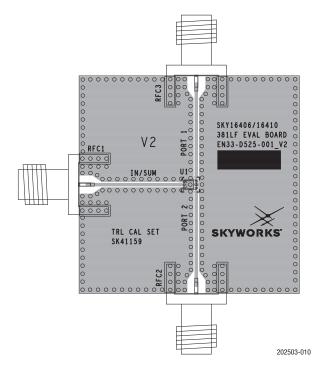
SKY16406-381LF Evaluation Board Assembly Diagram
